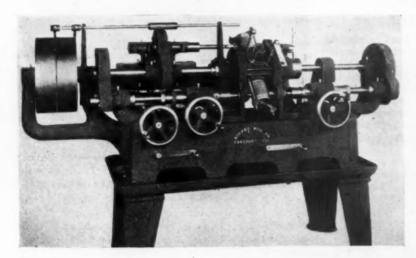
Hand-Operated Machine For Drilling, Boring and Reaming Piston Pin Holes. The economy with which machine can be changed over from one size piston to another is a feature
